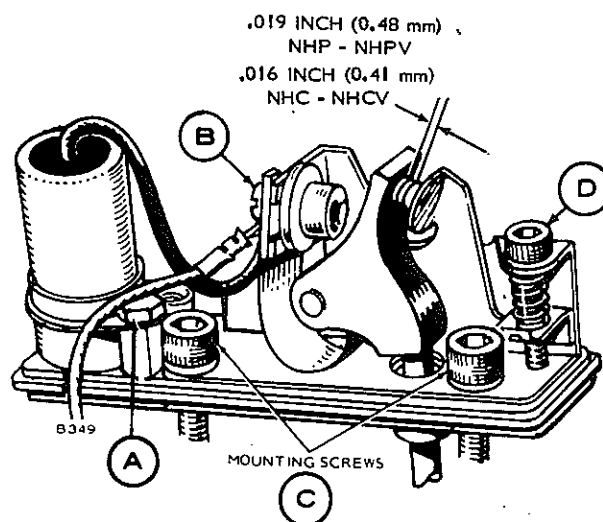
BREAKER POINT ADJUSTMENT
